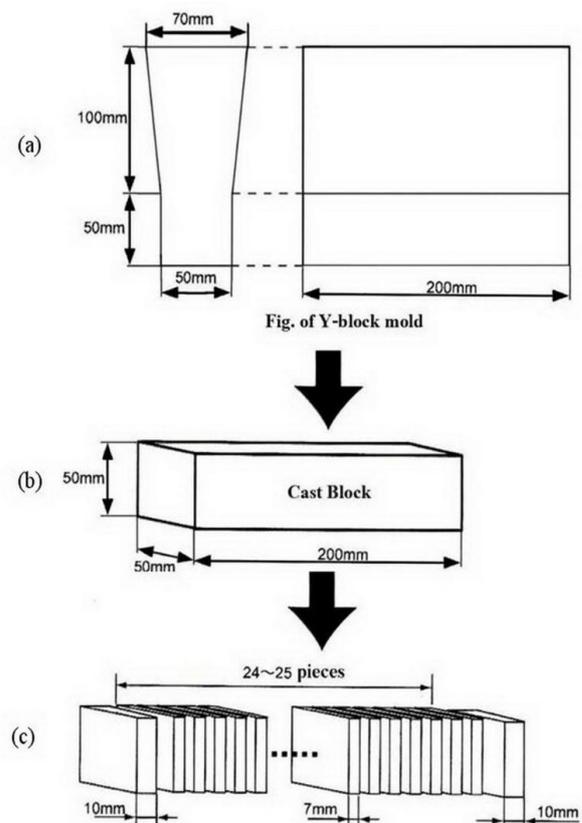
Schematic drawings of processes to make test pieces: (a) shape of casting, (b) substantial part and (c) test pieces
